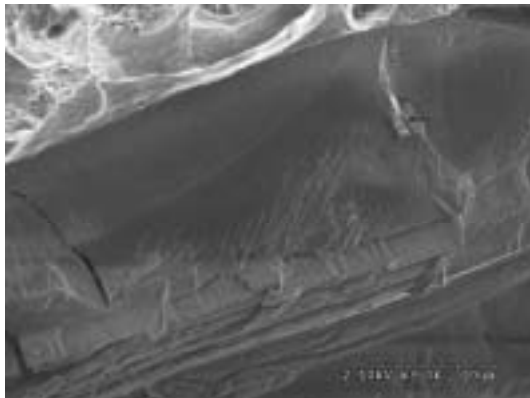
Brittle fracture surface of Type III finished charpy impact sample.
